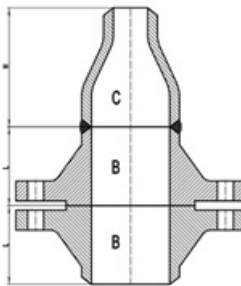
two standard welding neck flanges with one reducer to achieve
